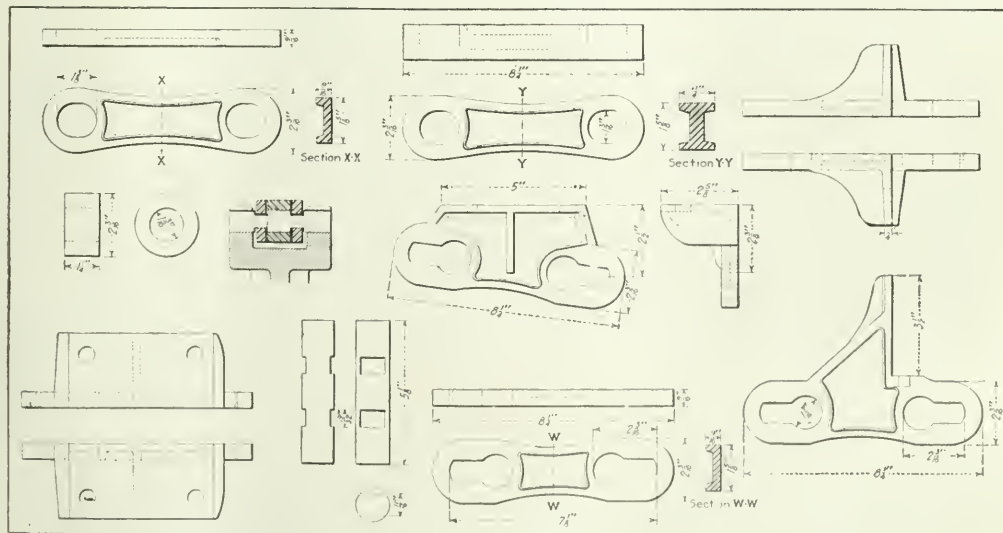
CONSTRUCTION DETAILS OF A NEW FORM OF RIVETLESS CONVEYOR CHAIN
